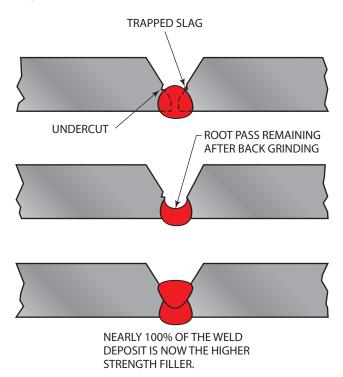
Back grinding to remove both undercut and trapped slag discontinuities; filler metal is used for the hot pass.
